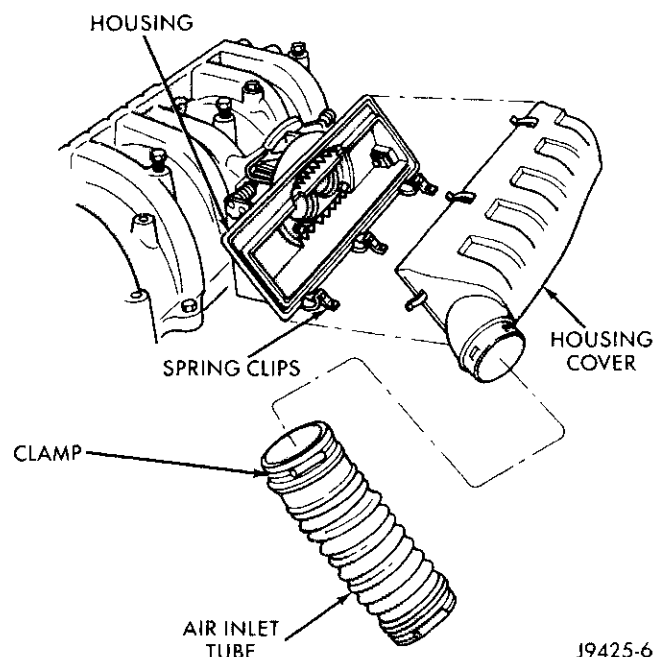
Air Cleaner Housing—8.0L V-10 Engine
